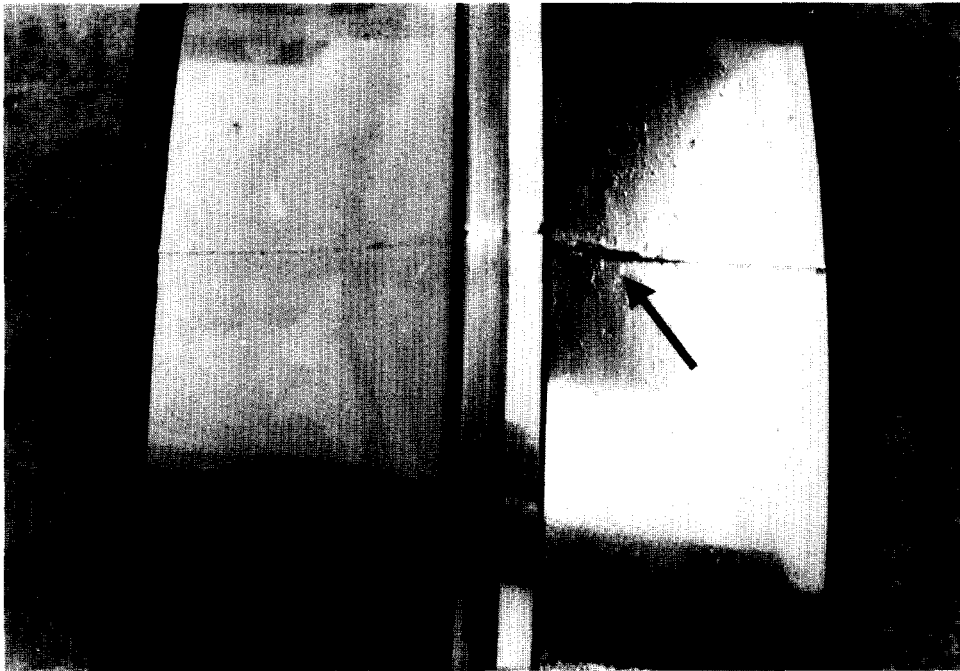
Inner ring of a thrust bearing showing extensive surface damage on one raceway, and through-cracking of the bearing ring.
